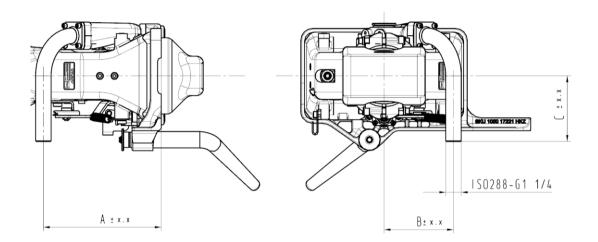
Position of the screw connection of the brake pipe (BP) - examples
